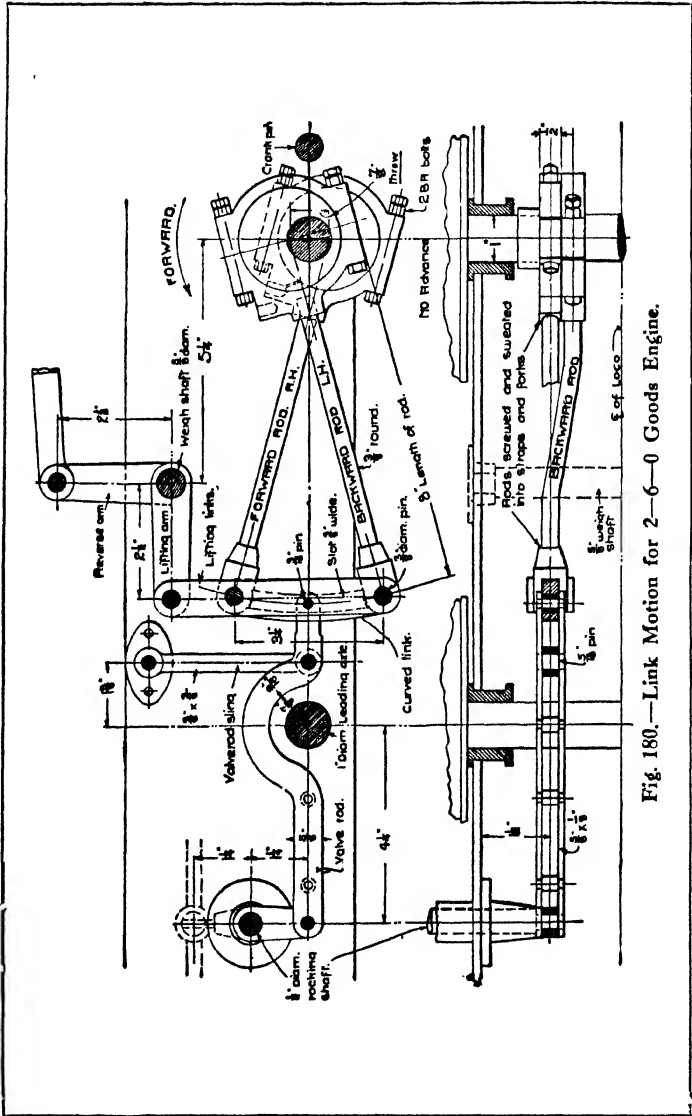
Link Motion for 2—6—0 Goods Engine.
